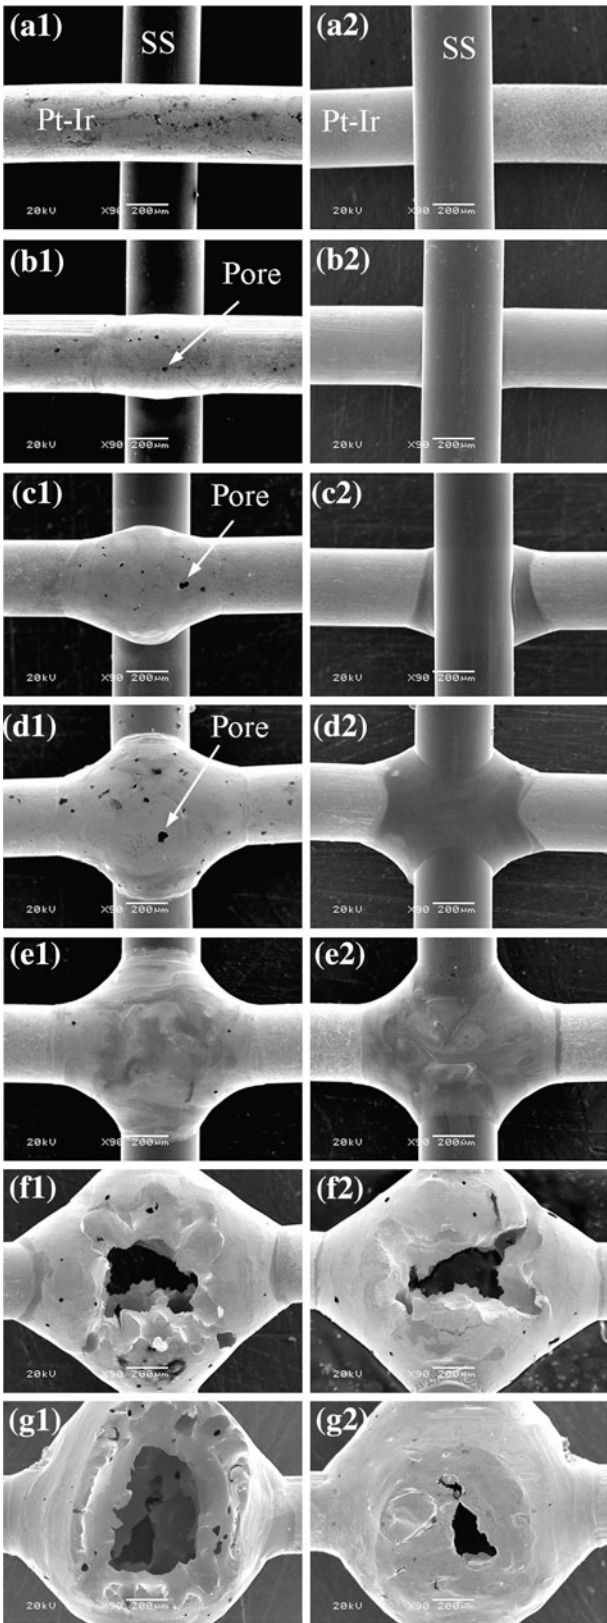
(a1) through (g1) Top and (a2) through (g2) bottom surfaces of welded crossed-wire joints with laser peak powers of (a) 0.28 kW, (b) 0.32 kW, (c) 0.36 kW, (d) 0.40 kW, (e) 0.42 kW, (f) 0.46 kW, and (g) 0.52 kW.
